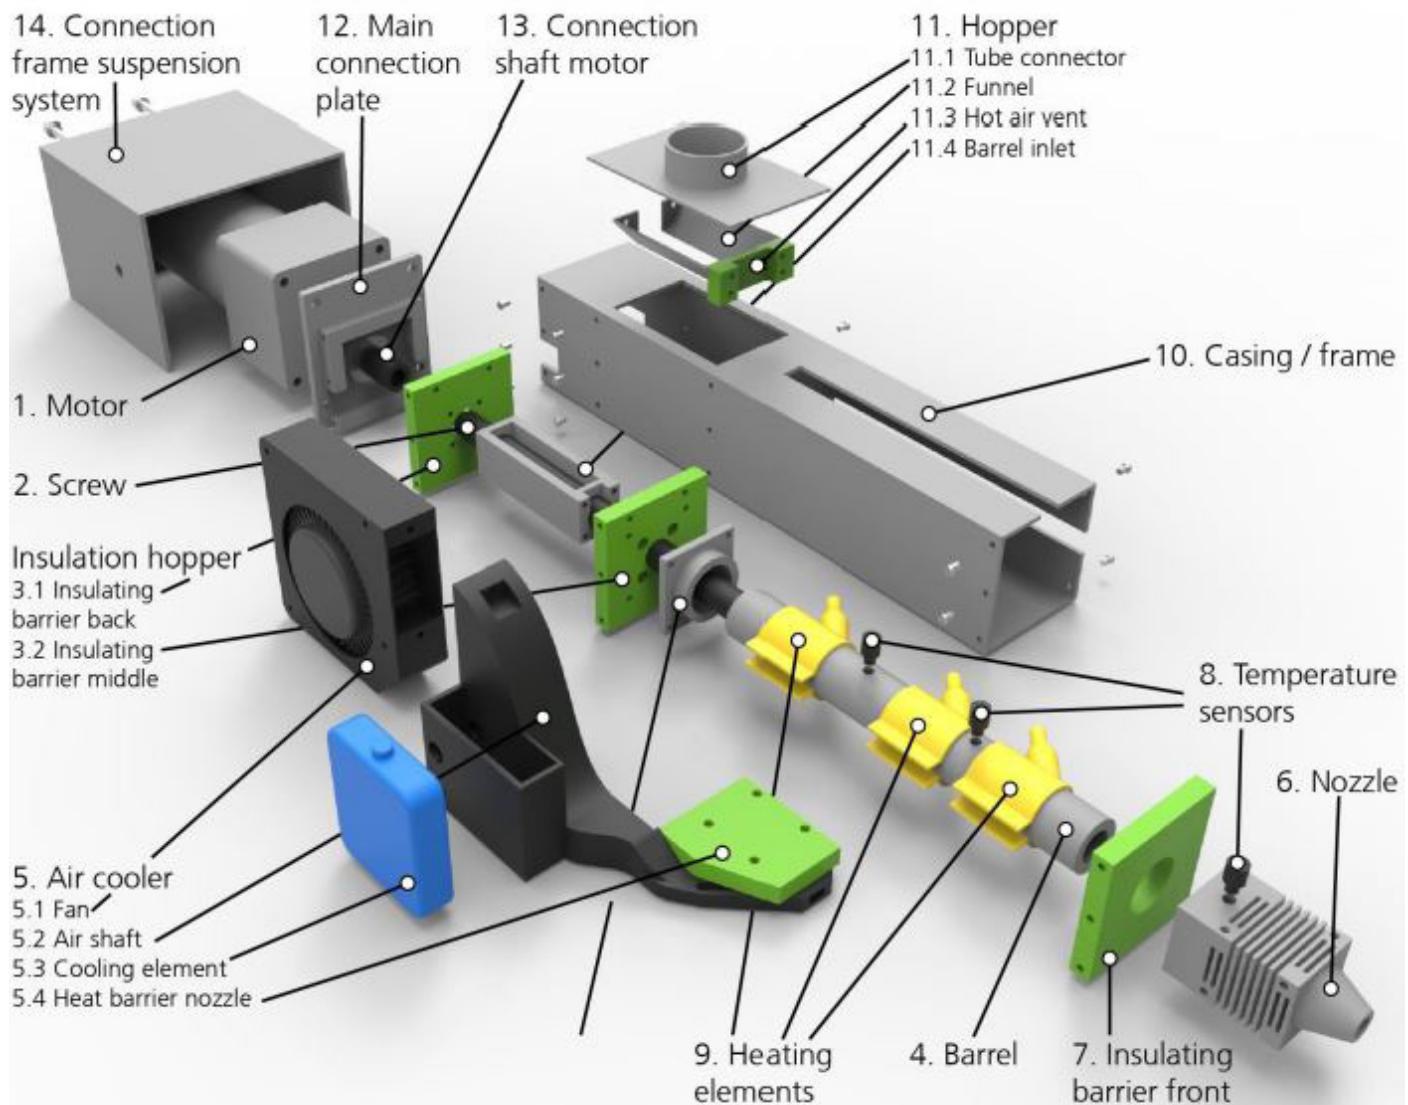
Exploded view current 3D-paintbrush. (Algra, J. 2017)
